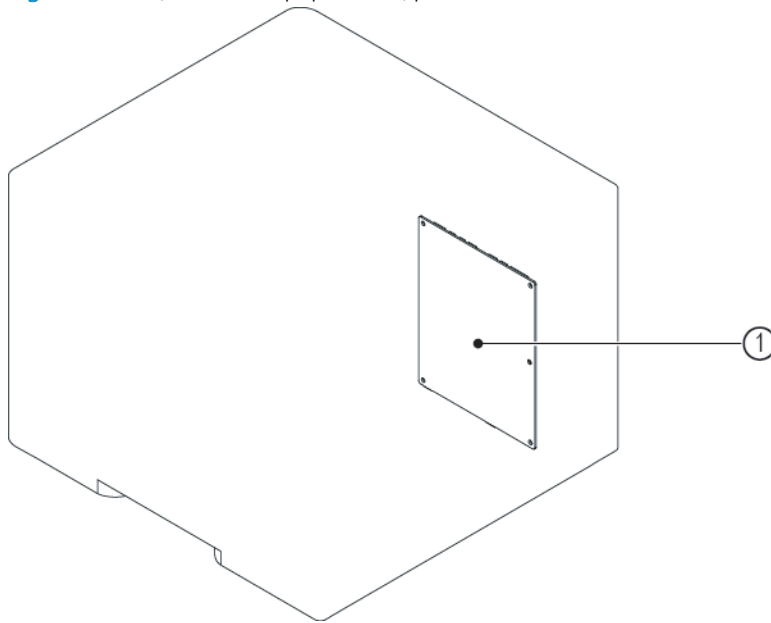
2,550-sheet paper deck, main assemblies (2 of 2)
